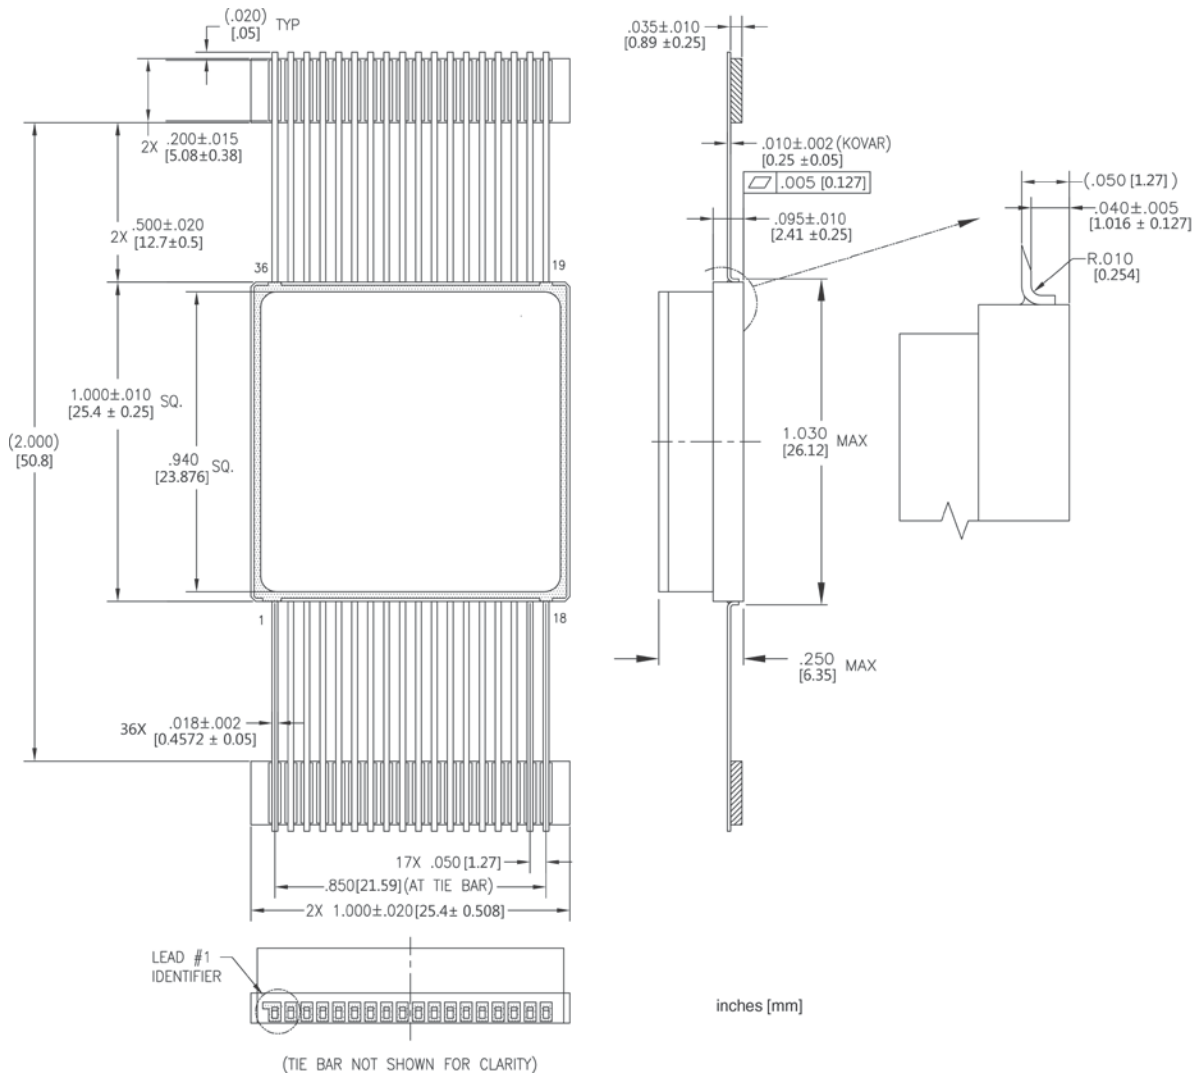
BU-67402 Mechanical Outline – SPACE-PHY 36-pin Flat Package
